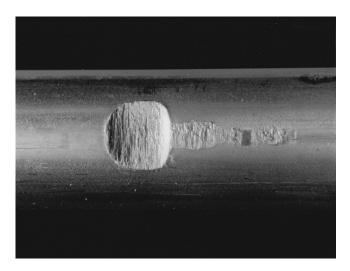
Tube-to-Tube Fretting Wear in a Power Plant Condenser.
